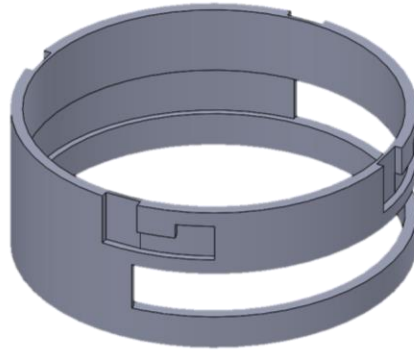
CAD model of the Preliminary R3 filter holder design.
